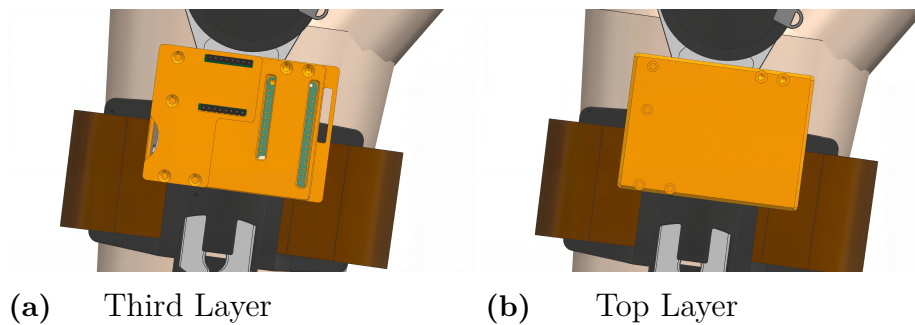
Structural layers of the electronic enclosure showing (a) the third-layer wiring layout and (b) the top-layer cover assembly.
